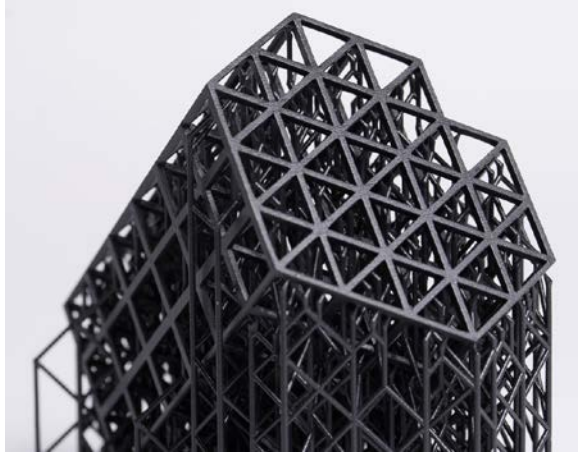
A 3D printed part that was fabricated in a single cycle. Models with complex interior geometries would be impossible to be made on other manufacturing machines. Image retrieved from 3D HUBS <<https://www.3dhubs.com/knowledge-base/advantages-3d-printing>>
